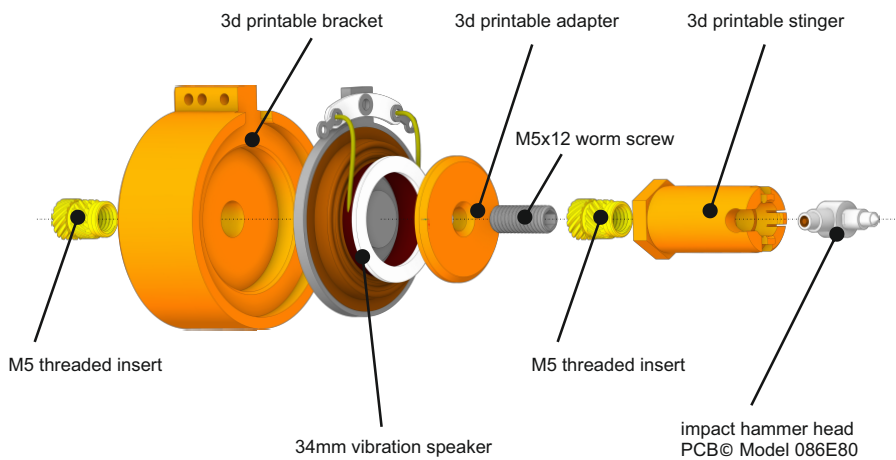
exploded view of the components using the 34 mm vibration speaker [5]. As the vibrational speakers coil is mounted much more flexible than on the 44 mm type we only recommend to use the in center mounted impact hammer setup [19].
